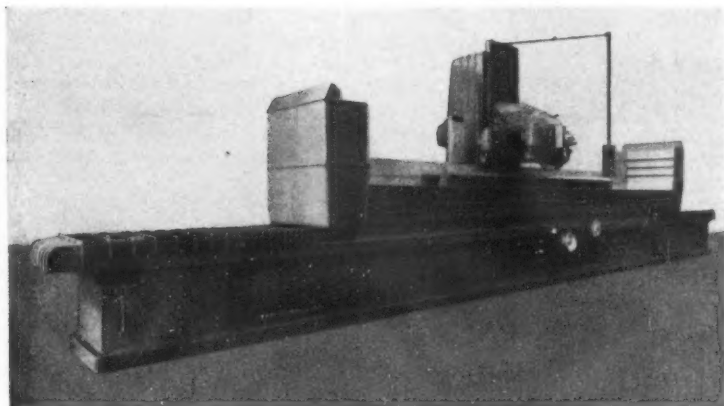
Zocca type RPA 6000 hydraulic slideway grinder
